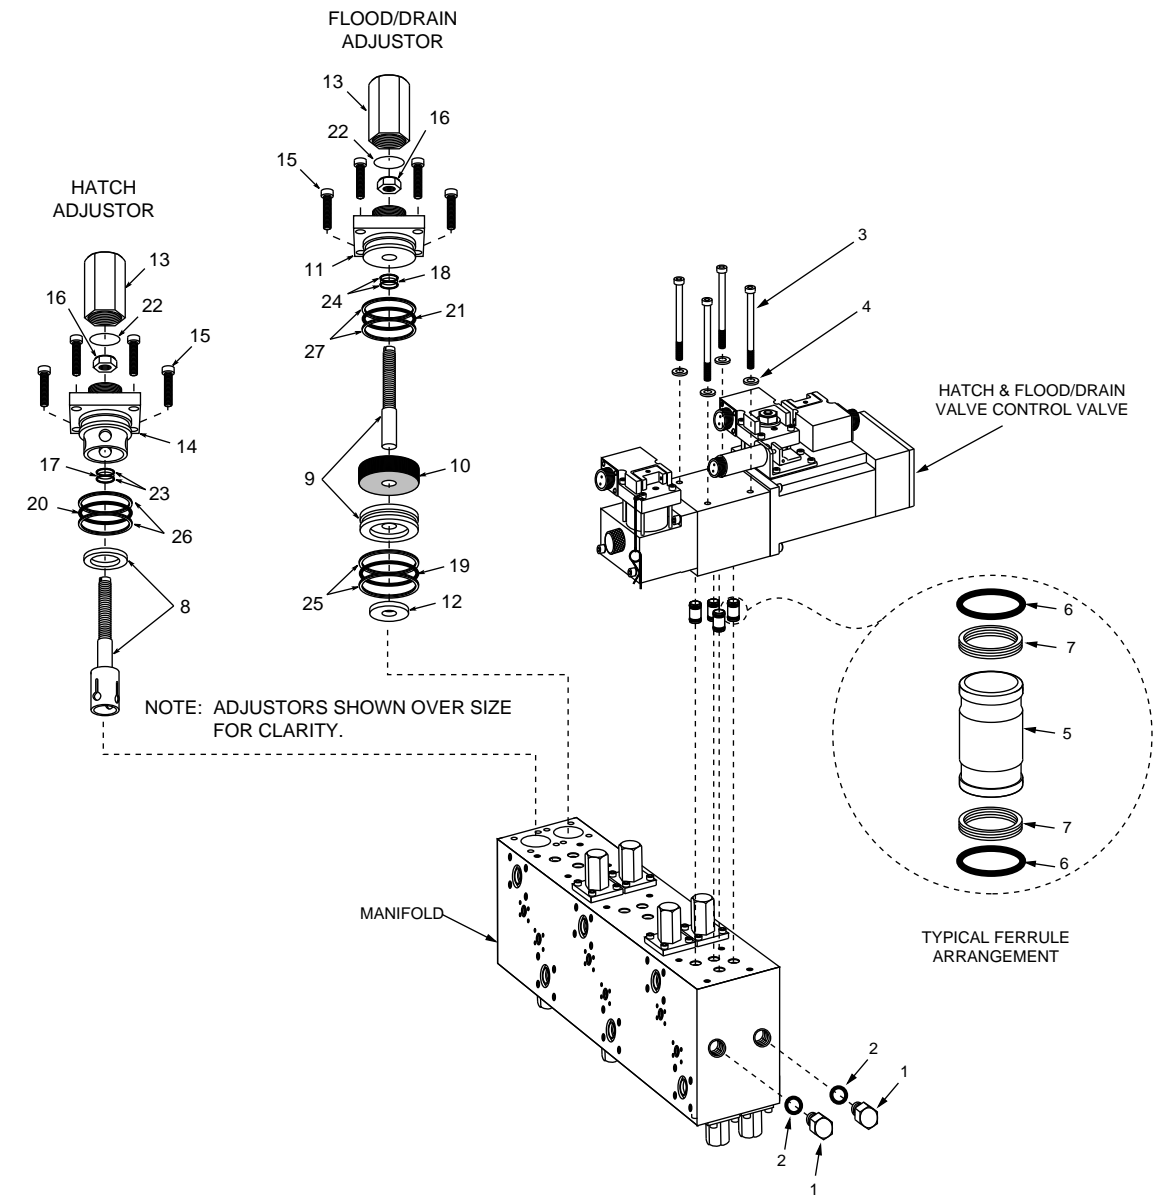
Six Valve Hydraulic Control Manifold
